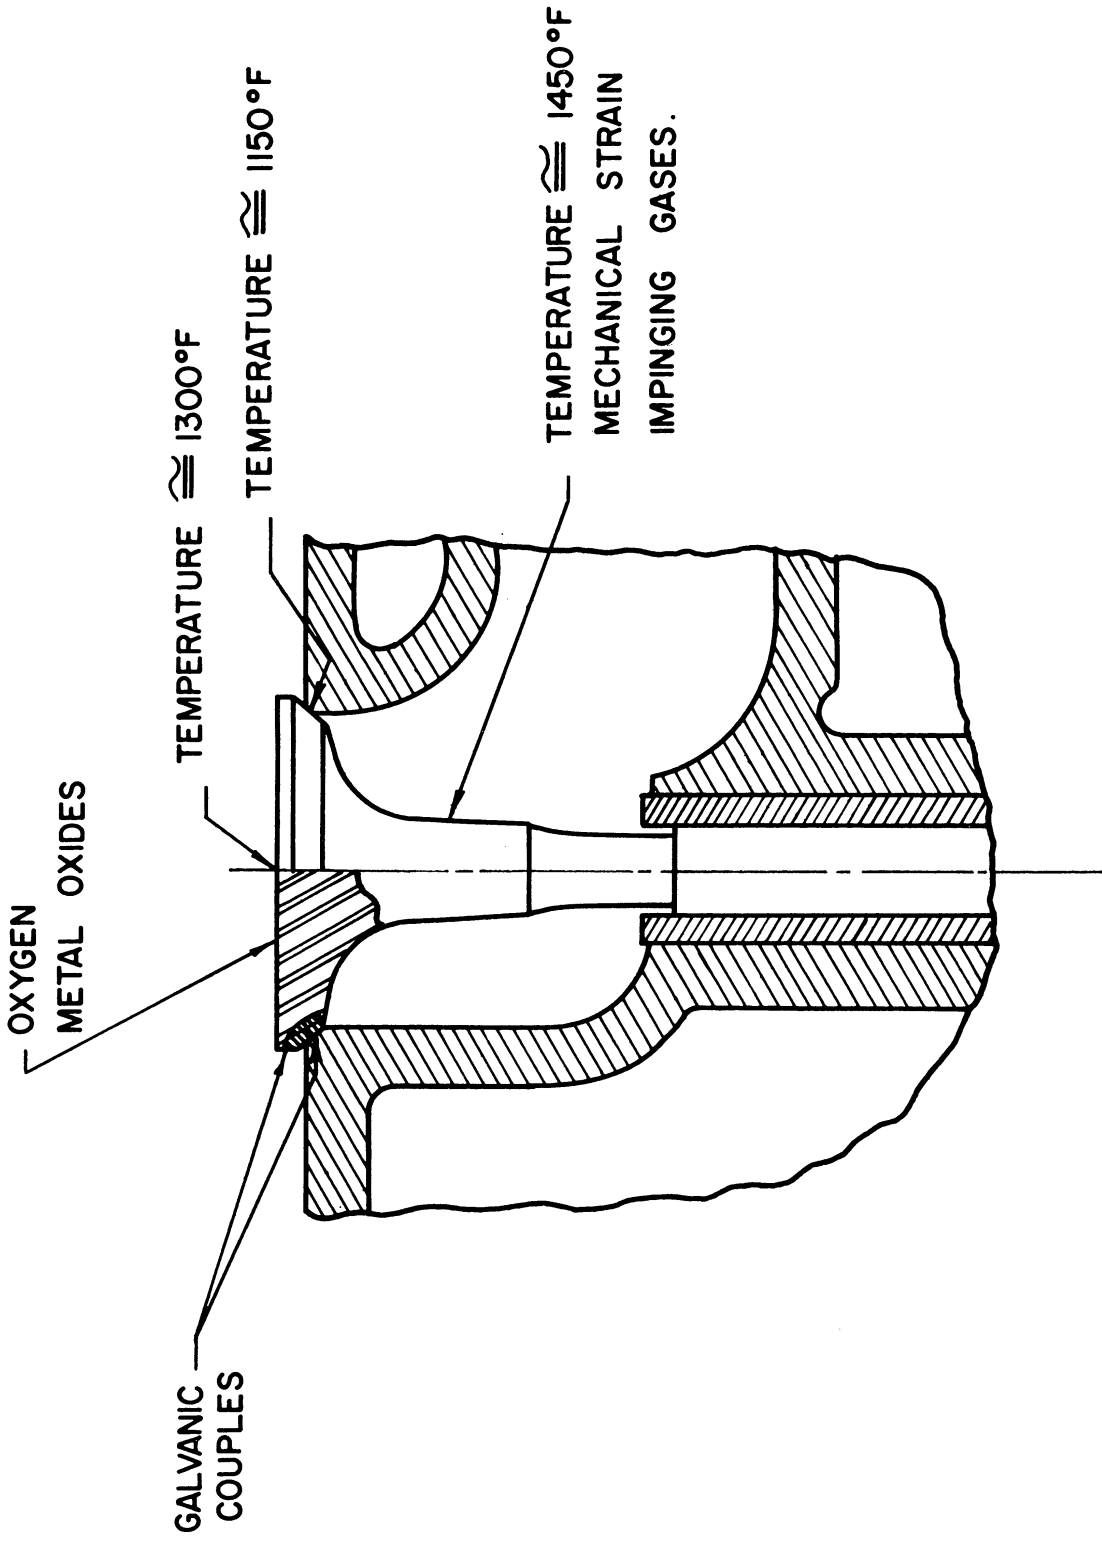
Environmental Factors Contributing to Corrosion on a Gasoline Engine Exhaust Valve.
